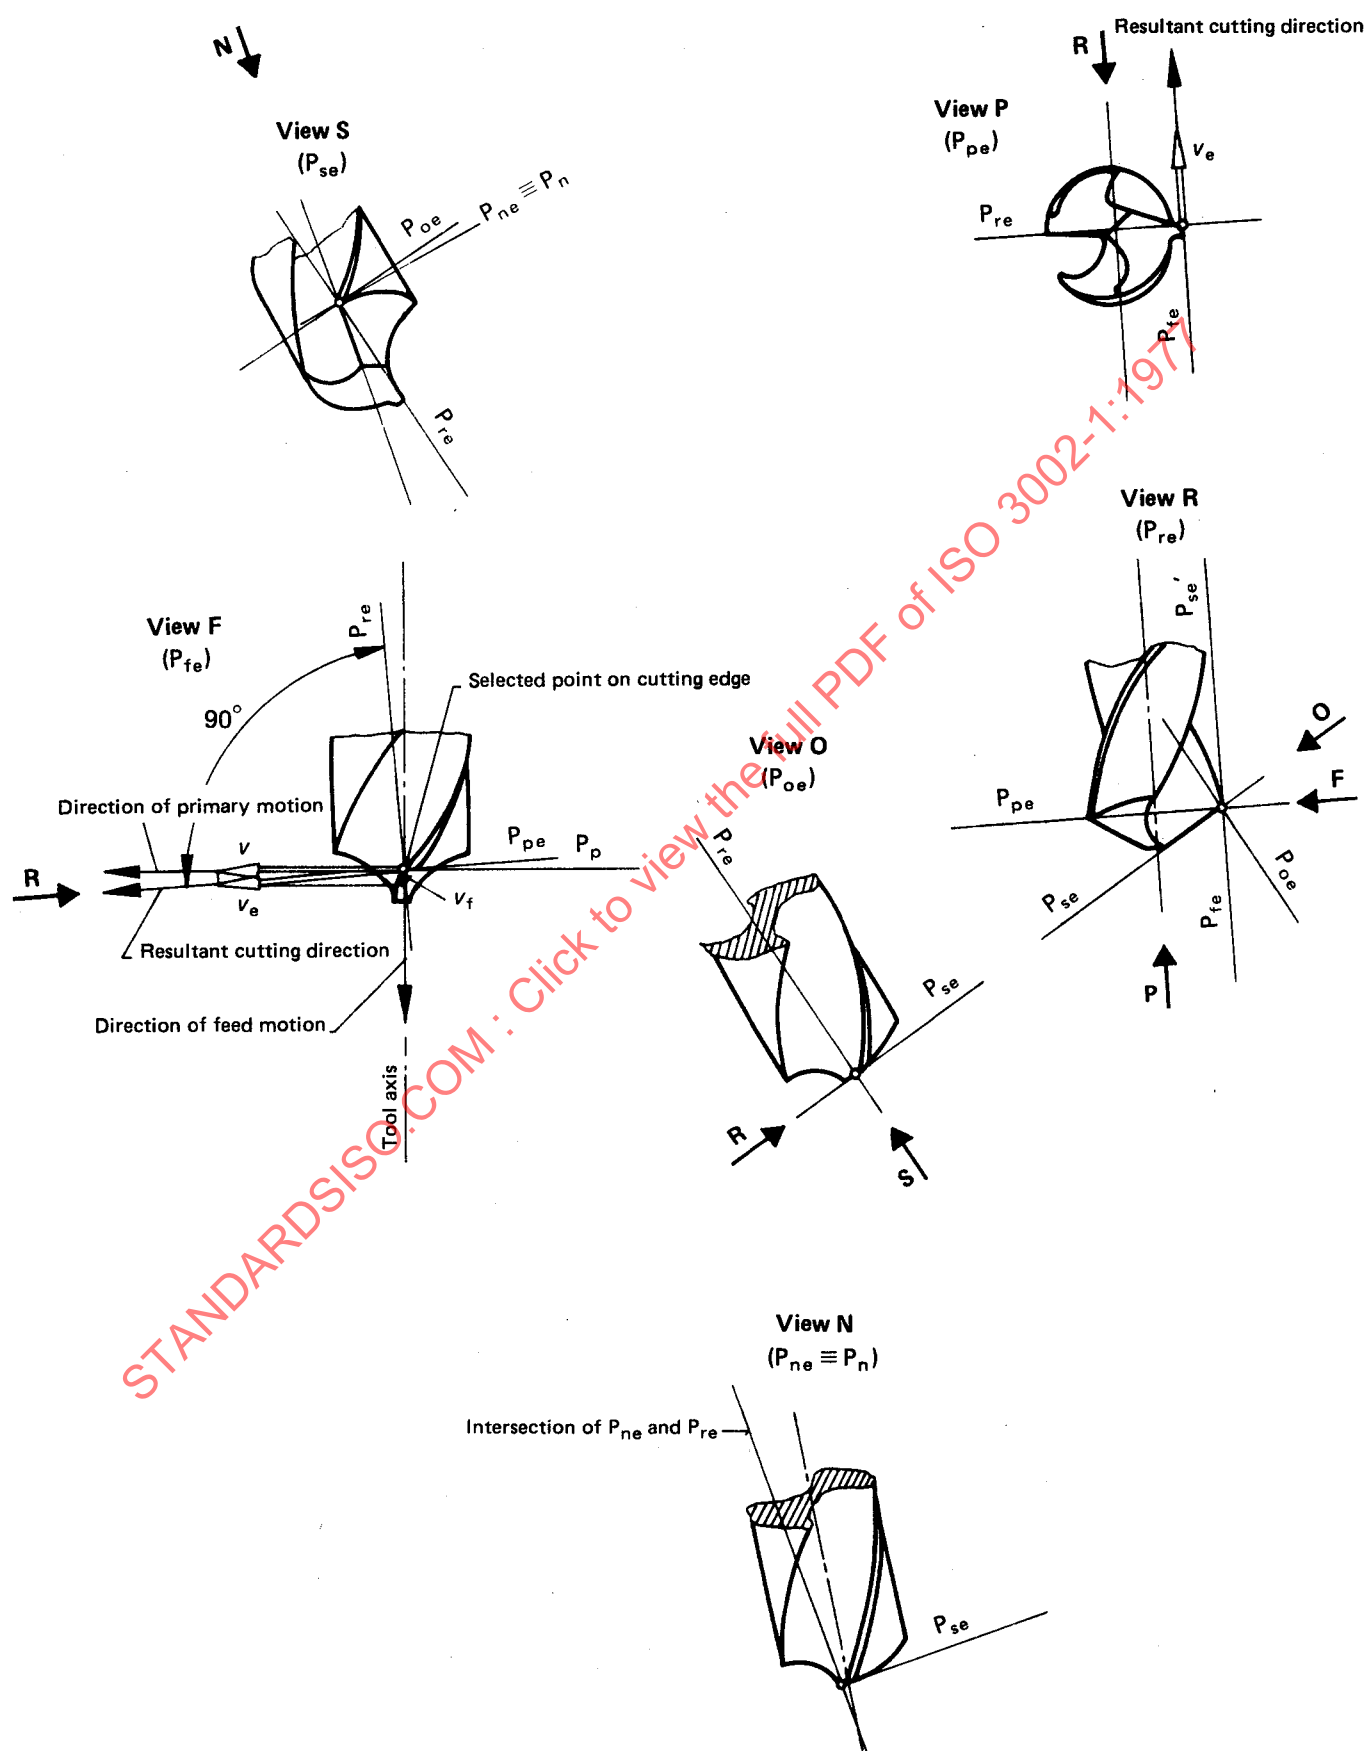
Planes in the tool-in-use system — Twist drill
